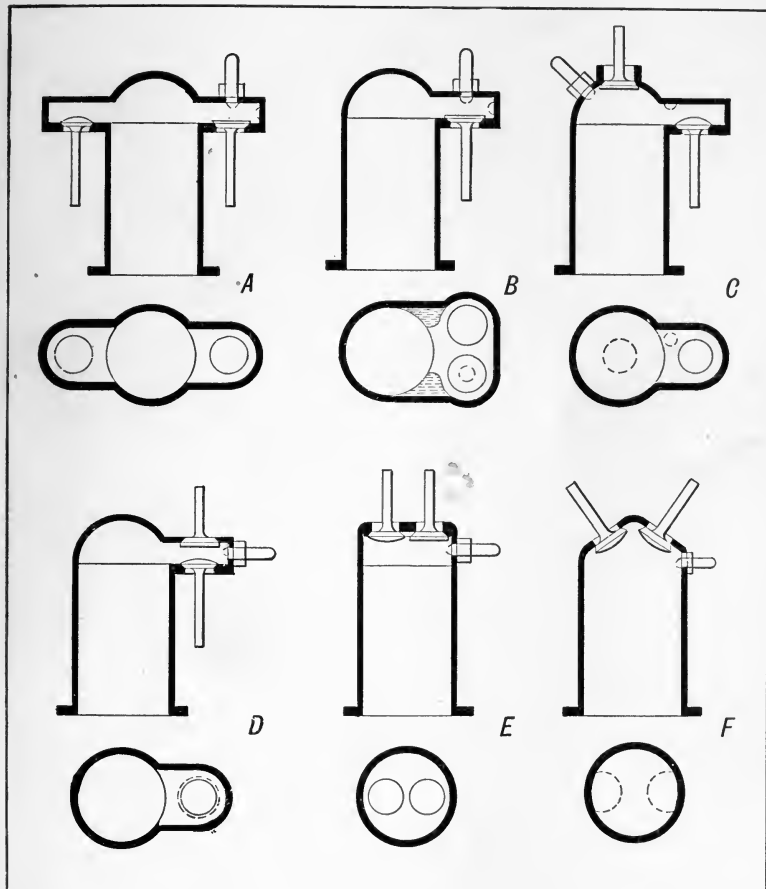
Diagram Showing Forms of Cylinder Demanded by Different Valve Placings. A—T Head Type, Valves on Opposite Sides. B—L Head Cylinder, Valves Side by Side. C—L Head Cylinder, One Valve in Head, Other in Pocket. D—Inlet Valve Over Exhaust Member, Both in Side Pocket. E—Valve-in-the-Head Type with Vertical Valves. F—Inclined Valves Placed to Open Directly into Combustion Chamber.
